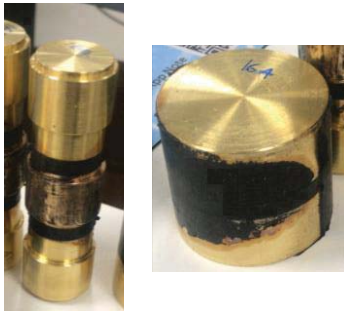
Left: DBS testpiece; Right: Compressive testpiece
